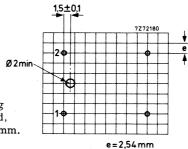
Hole pattern for mounting on a printed-wiring board, hole diameter 1, 3 + 0, 1 mm.
